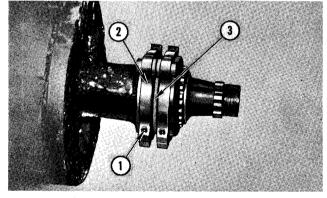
GENERATOR BRUSH ASSEMBLY 1. Capscrew 2. Half Ring 3. Insulating Washer
